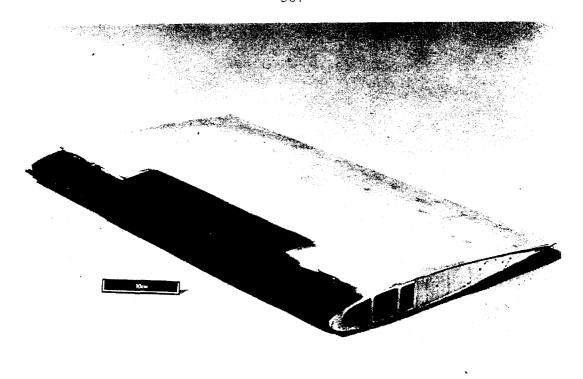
Whirlwind main rotor blade section with heater mat and flexible coating
